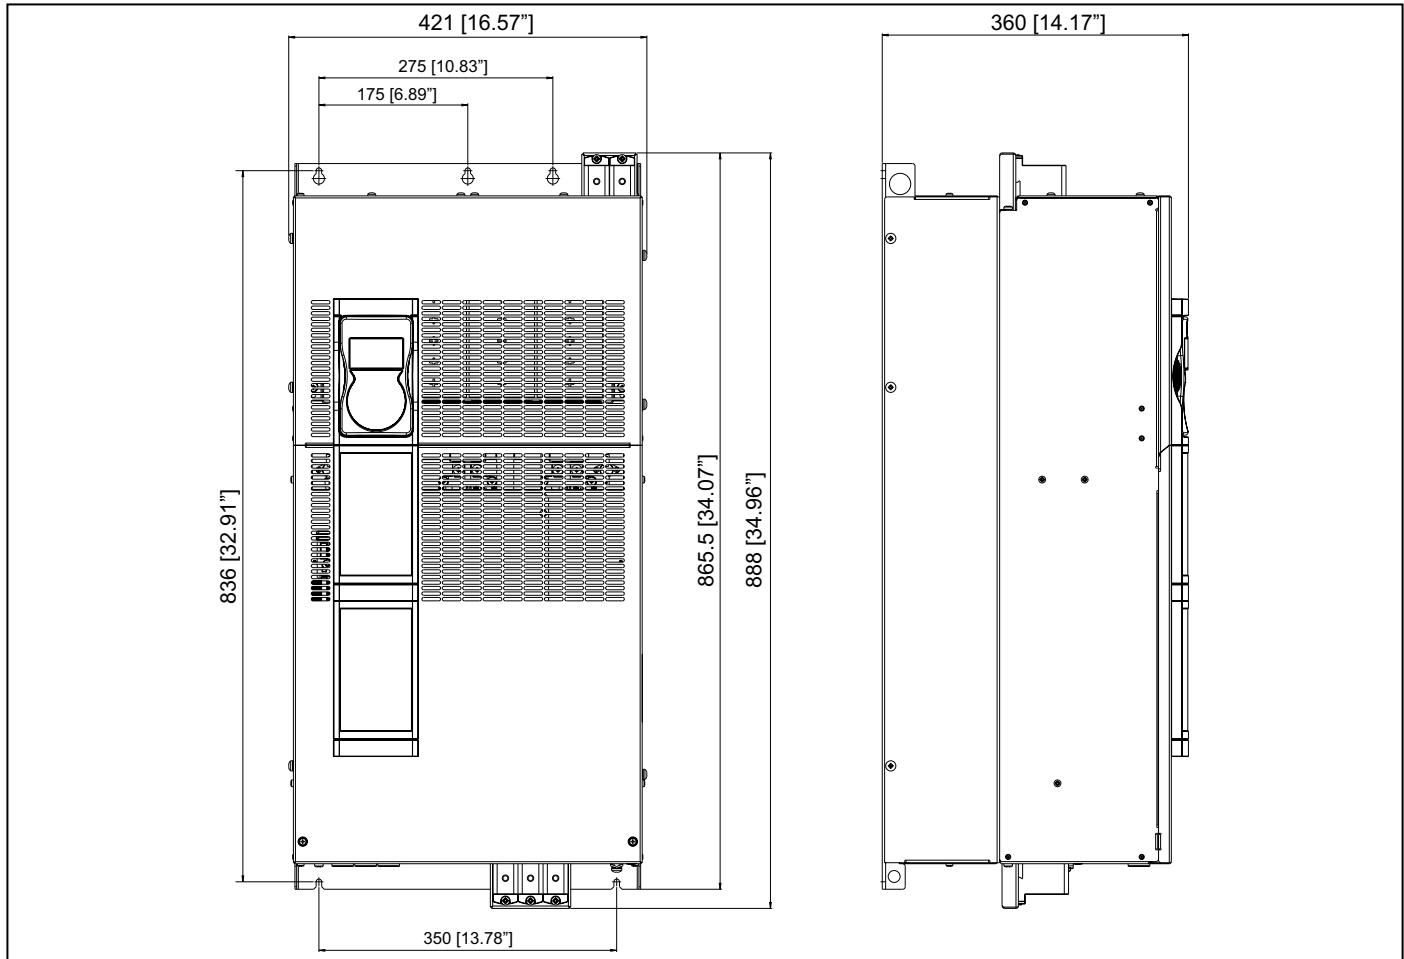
Size ADV200 SP-61320...-DC dimensions
